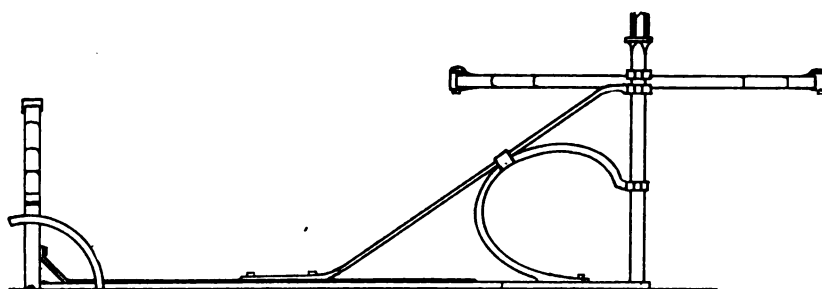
SHOWING HALF TOP VIEW OF WAGON GEAR
